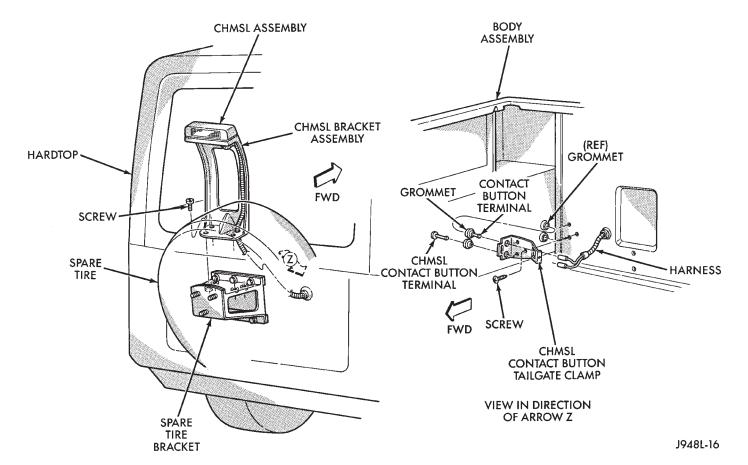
Center High Mounted Stop Lamp (CHMSL) Bracket Assembly
